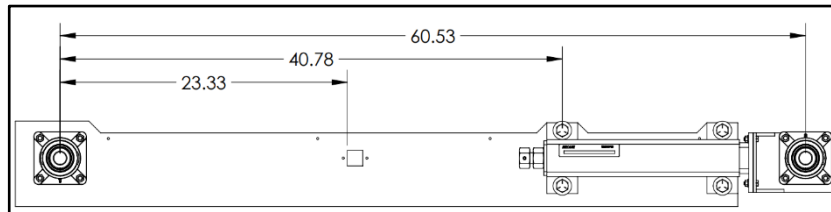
Layout of the Inner Member. The take-up assembly, shown on the right, connects the rear bearings to the inner member.
